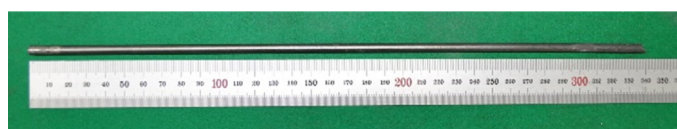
Metallic fuel slugs fabricated by modified injection casting
